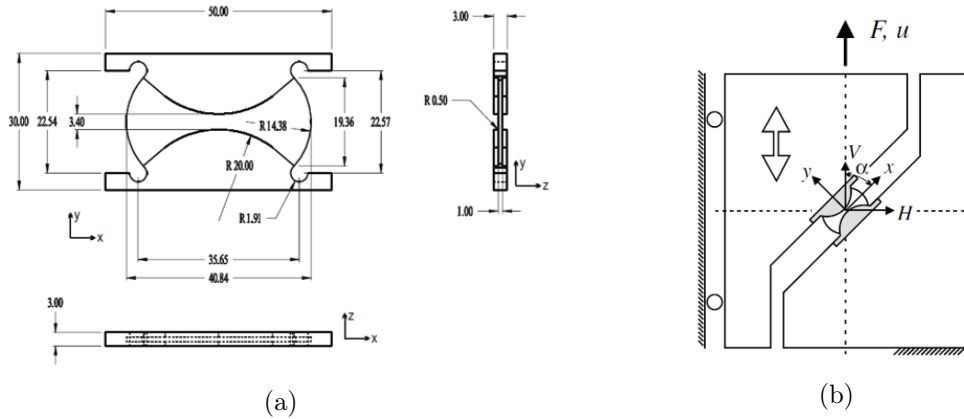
Shape and dimensions in mm (a) of the designed flat specimen and (b) mechanical testing sketch developed in [Mohr and Henn 2007].
